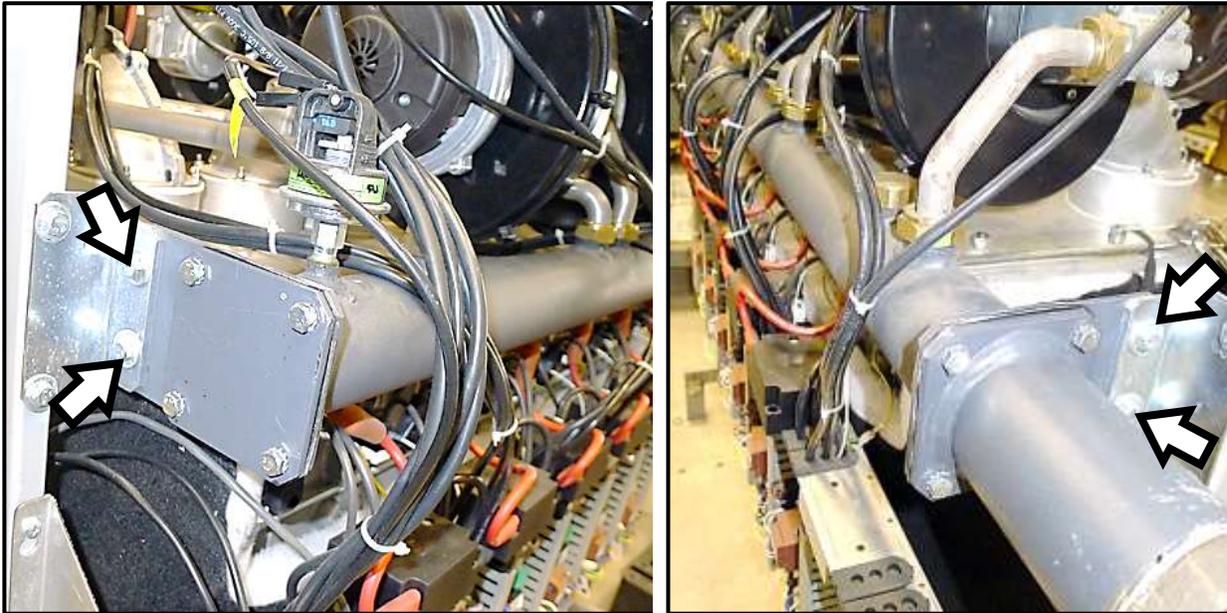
Uninstall Gas Collector Tube from Boiler Chassis (Step 12)
